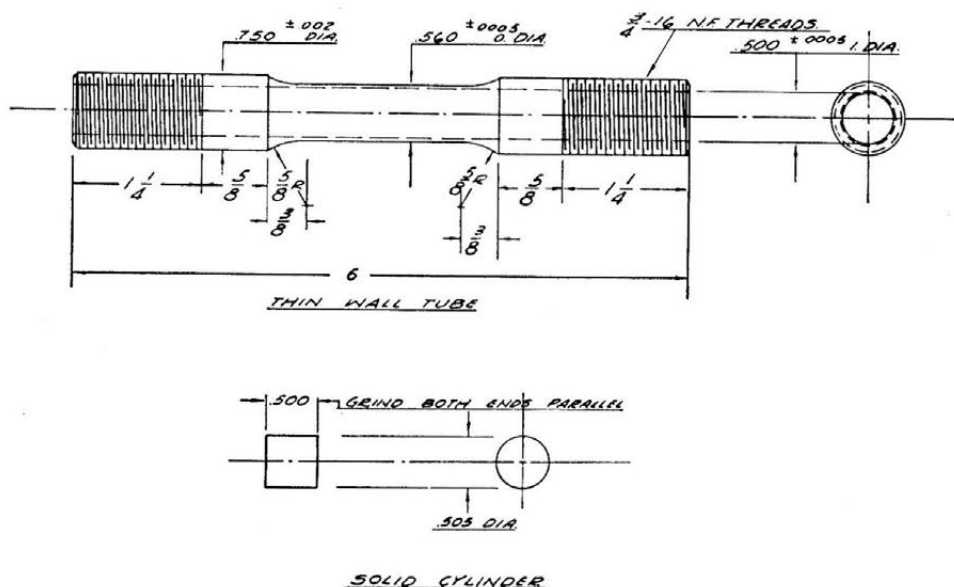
GRAY-CAST-IRON FRACTURE SPECIMENS
